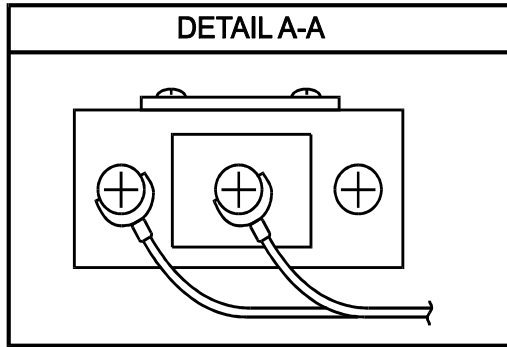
Brake Weldment Assembly, SB2
